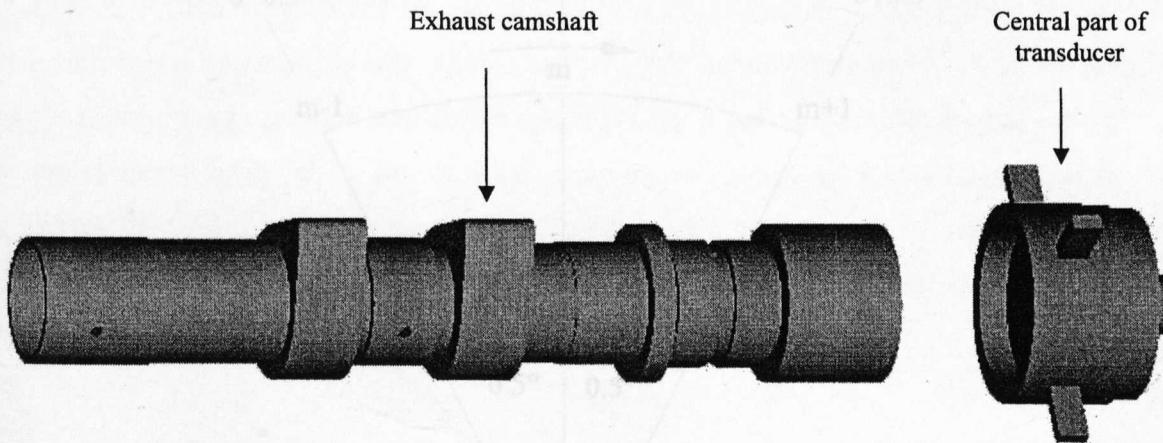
(b). Exhaust camshaft assembly, not to scale, (camshaft + central part of pulley torque transducer).
